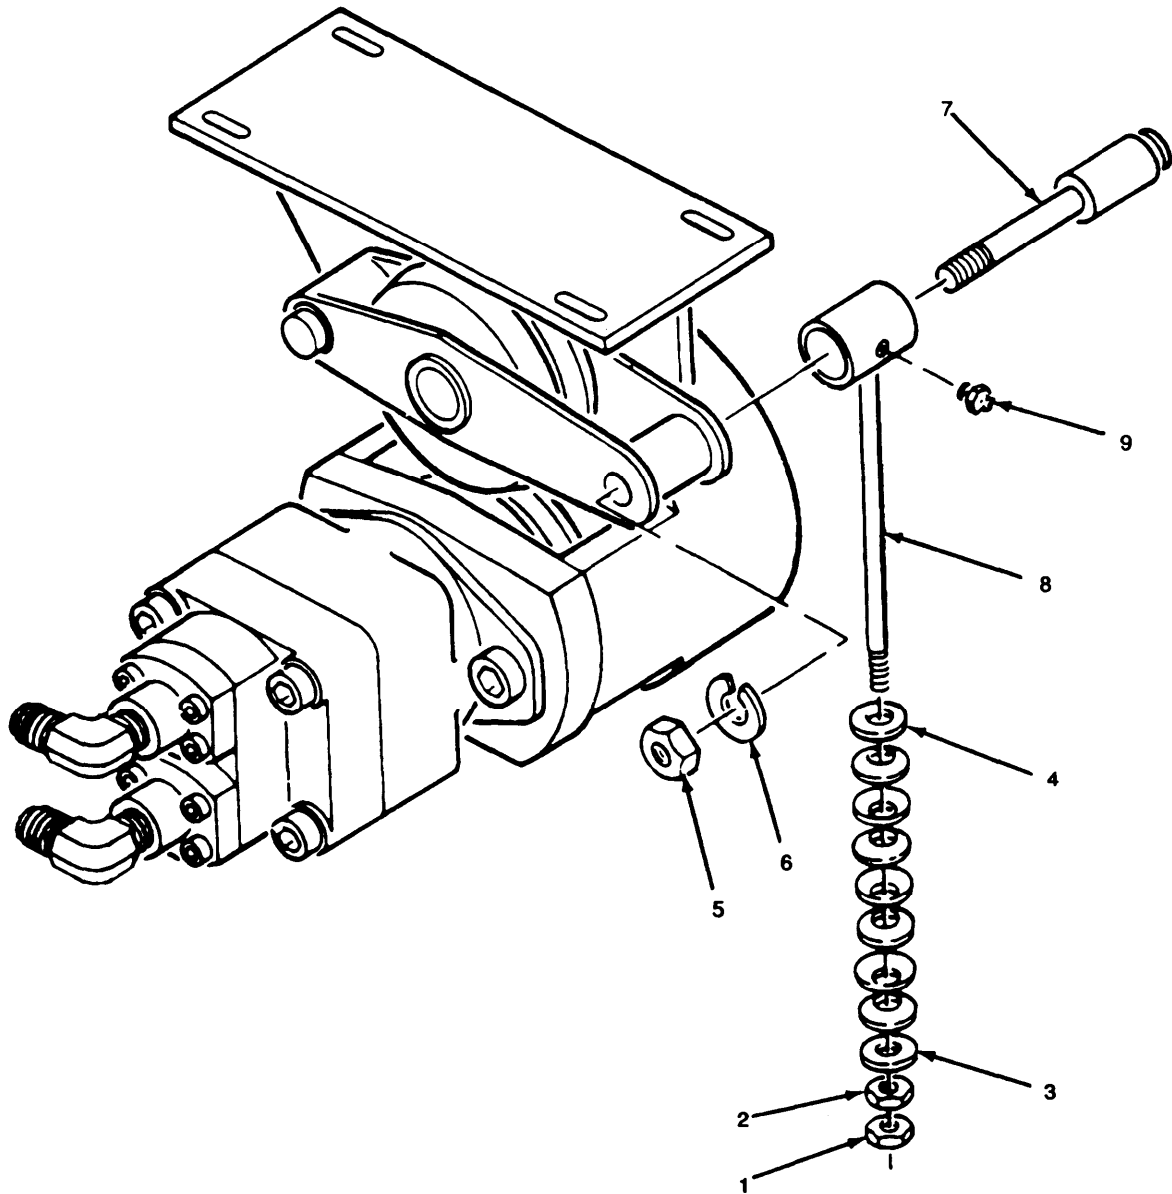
Cable Tensioner Assembly, Repair (Sheet 1 of 4).
